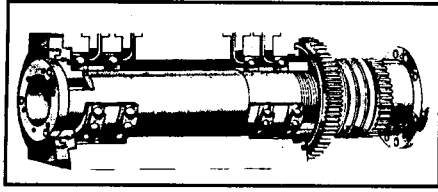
Machine Tool Spindle with Ball Bearings for Lathe (SKF)
